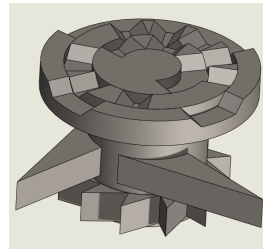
The gear integrated disks contain raised and lowered surfaces to move the pins above and below the face of the watch
